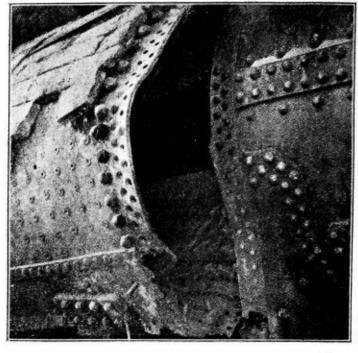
Lower Rail Removed to Renew Rivets and Welded Back in
